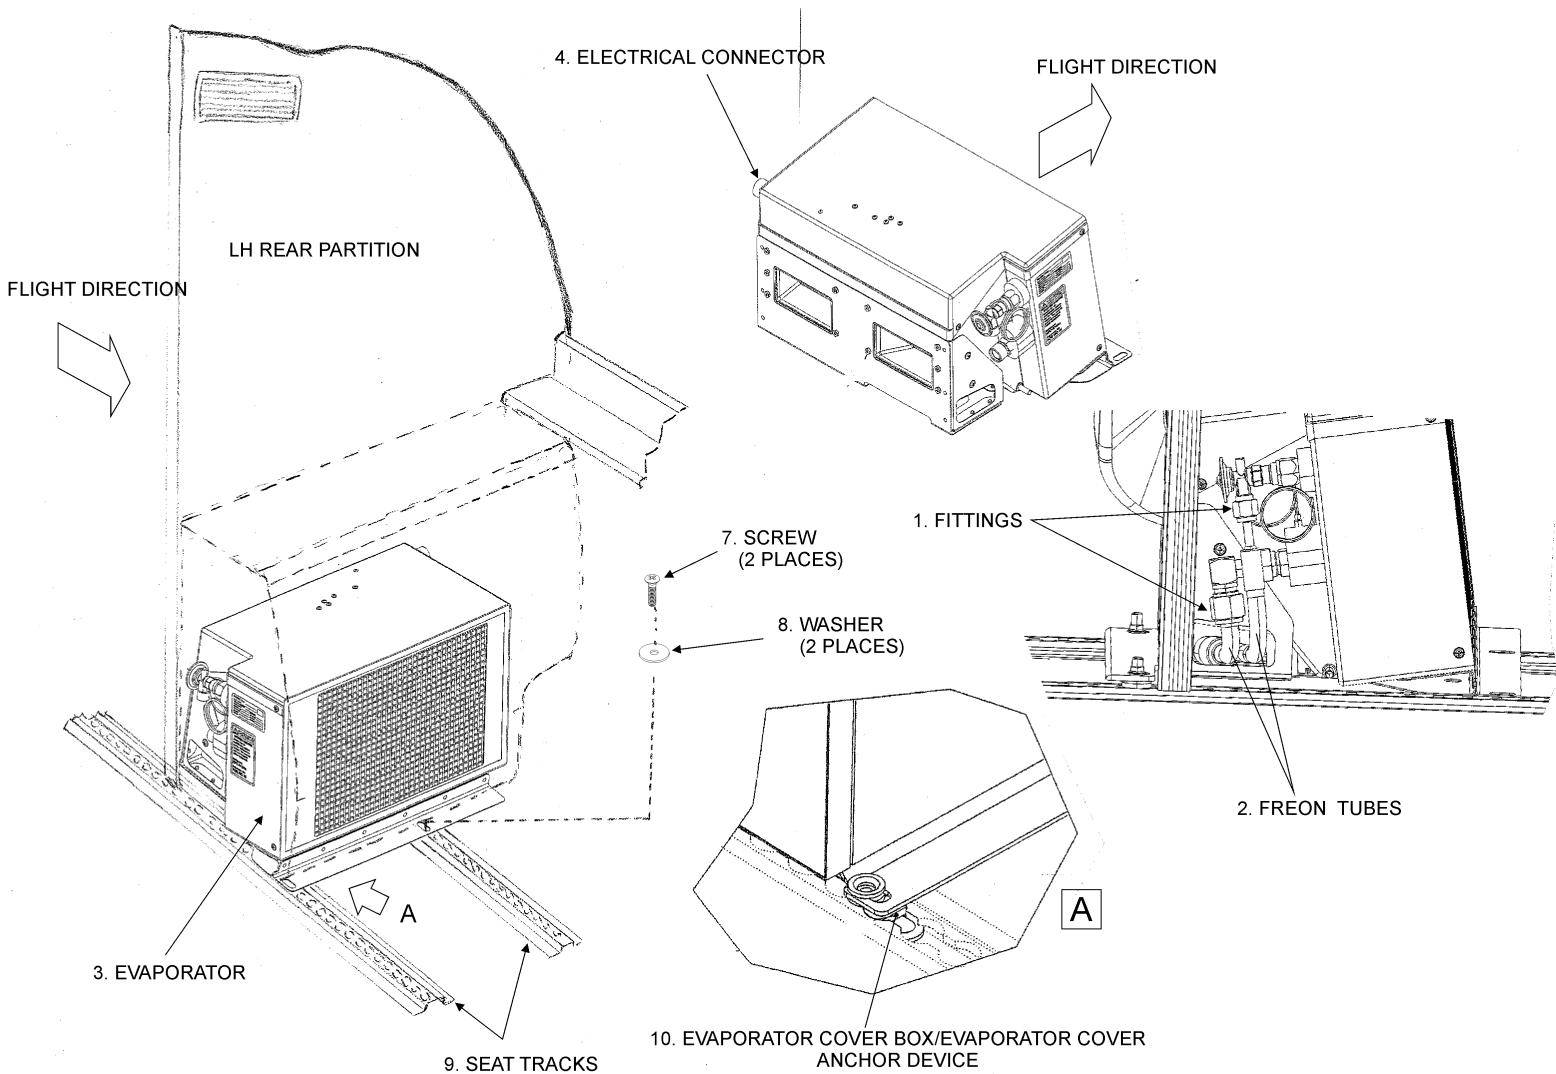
Evaporator - Removal / Installation (Sheet 2 of 2)
